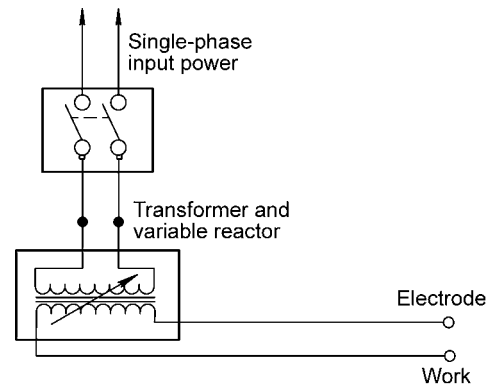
Typical small, single-phase, alternating current output transformer welder
